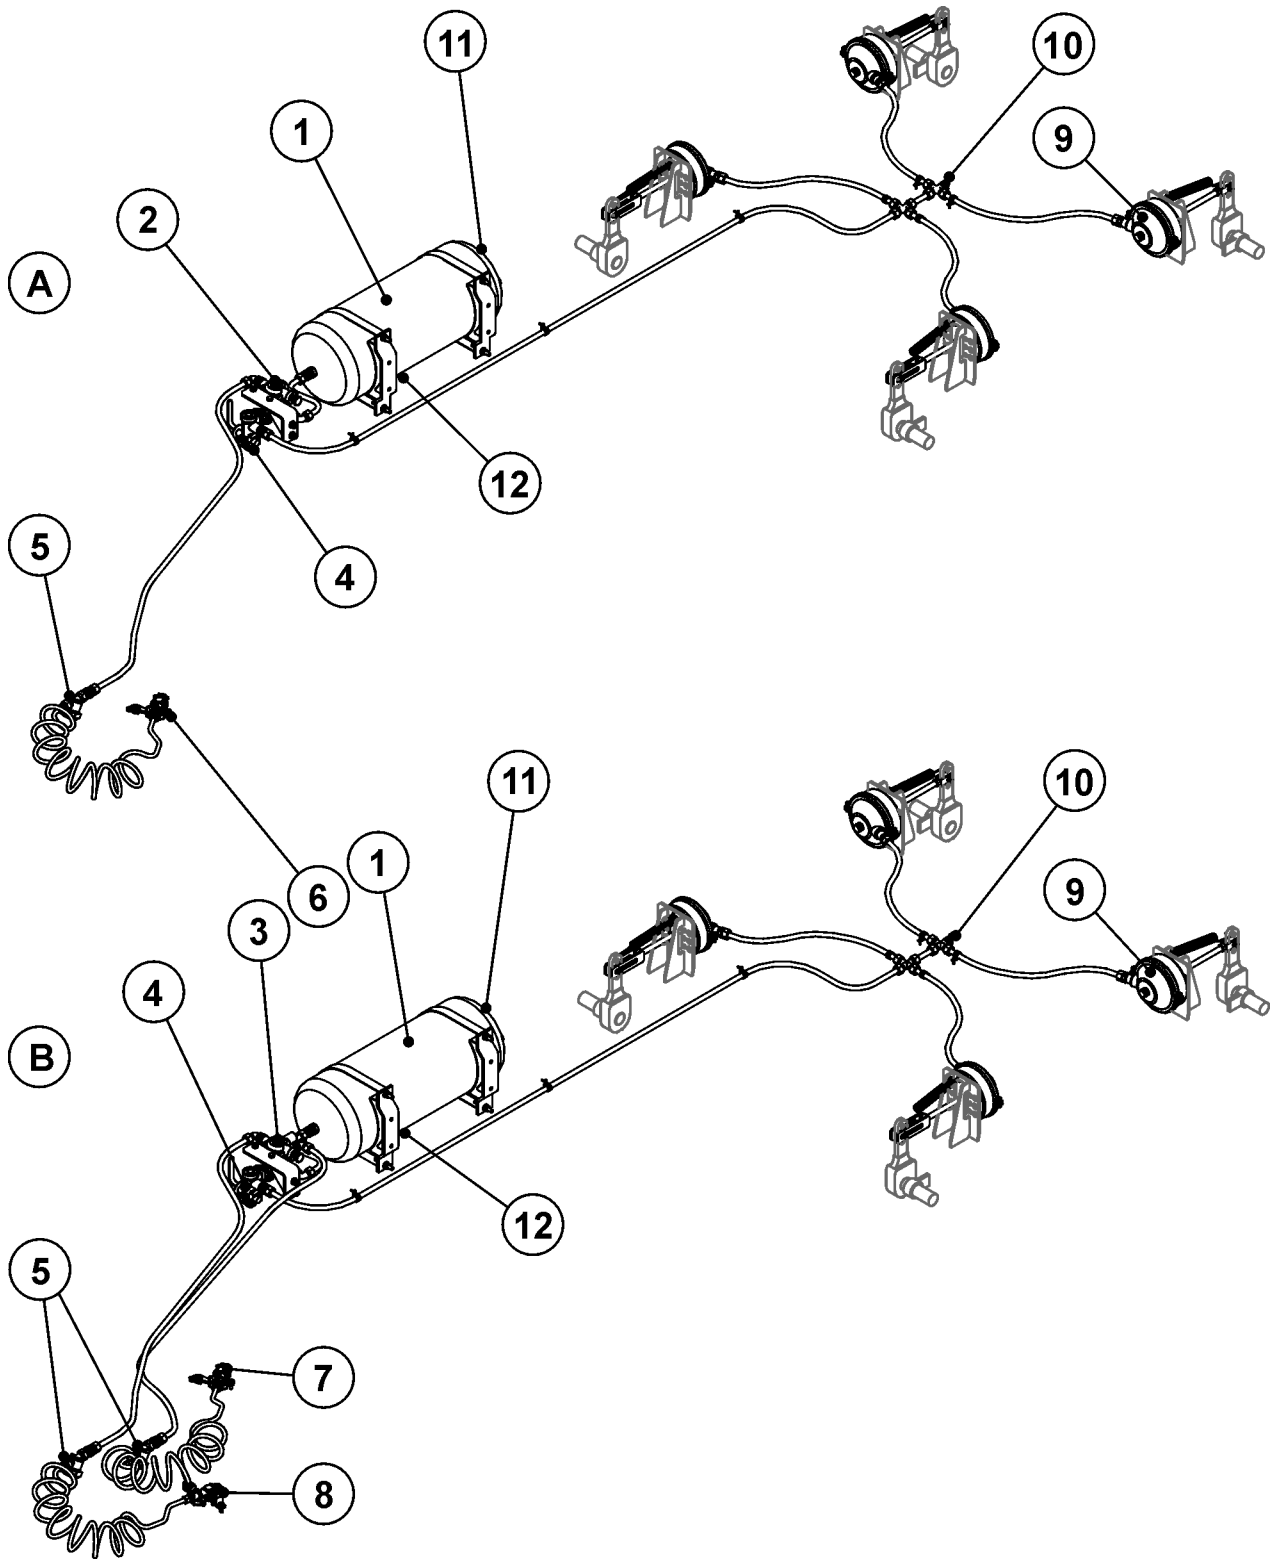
PNEUMATIC BRAKE SYSTEMS – SINGLE- AND DOUBLE CONDUIT.
